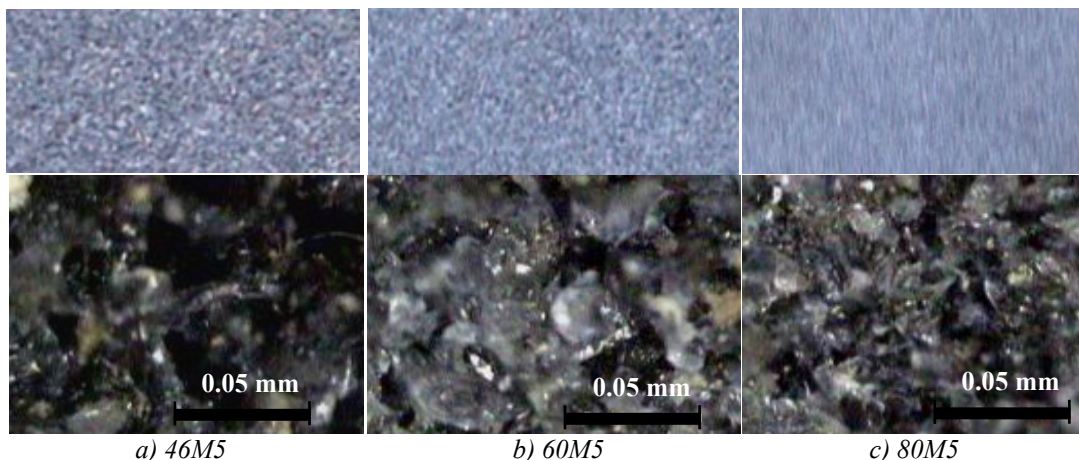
Workpiece surface appearance depending on grinding wheel grain size
